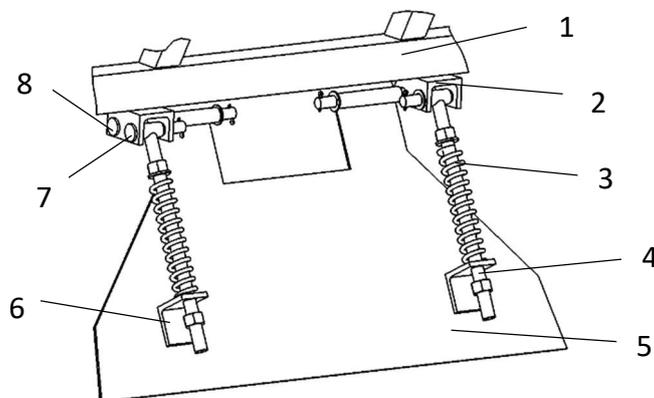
Schematic of the soil-covering system: 1) frame; 2) mounting base; 3) coil spring; 4) support rod; 5) soil cover board; 6) location base; 7) support rod positioning dowel; and 8) cover board positioning dowel.
